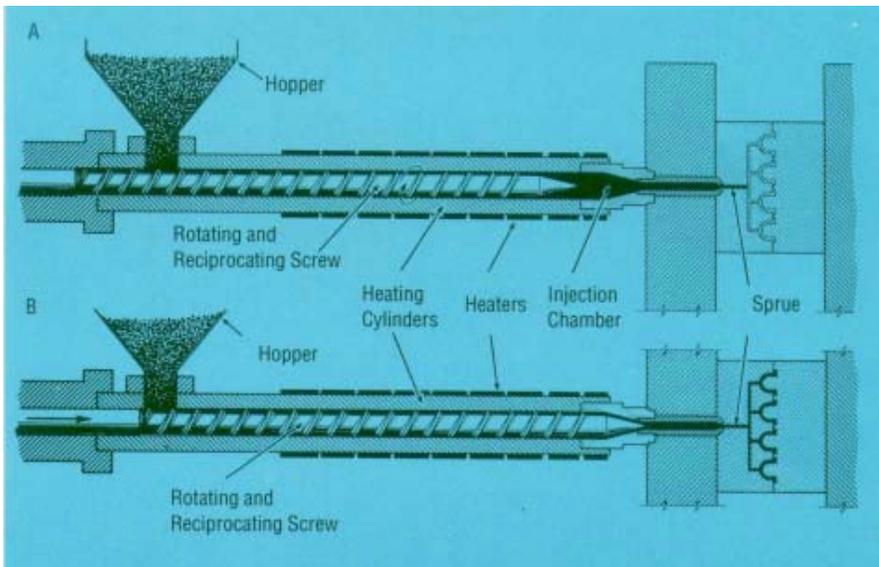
Schematic cross section of a typical screw injection molding unit showing the screw in the retracted (A) and the forward (B) position.
